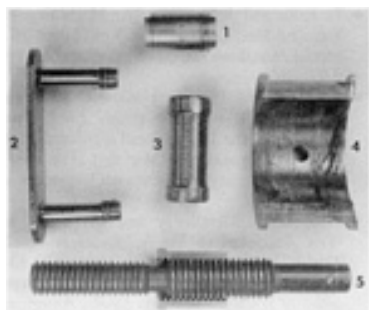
Parts subject to wear and galling problems. (1) Bushing for chain belt. (2) Link for chain belt. (3) Bushing for chain. (4) Rod end bearing. (5) Valve stem. Source: Ref 28
